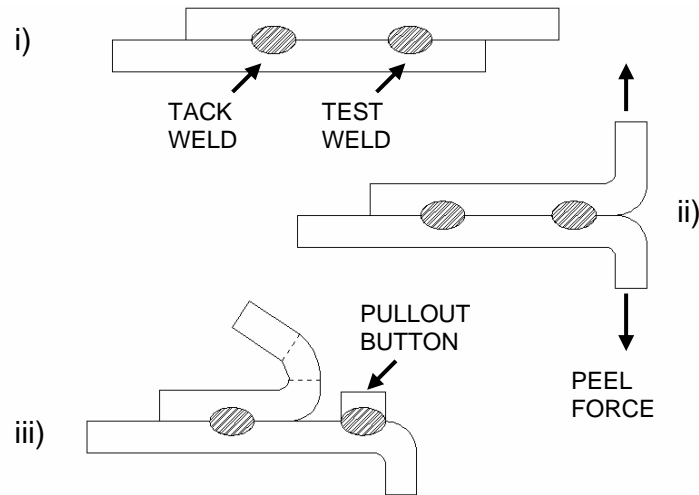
Peel Test Schematic. i) the peel test sample is welded tack weld first, then test weld. ii) the ends of the sample on the test weld side are bent back and a peel force is applied. iii) the weld is pulled to failure and either interfacial failure occurs yielding no button, or weld pullout occurs yielding a peel button.
